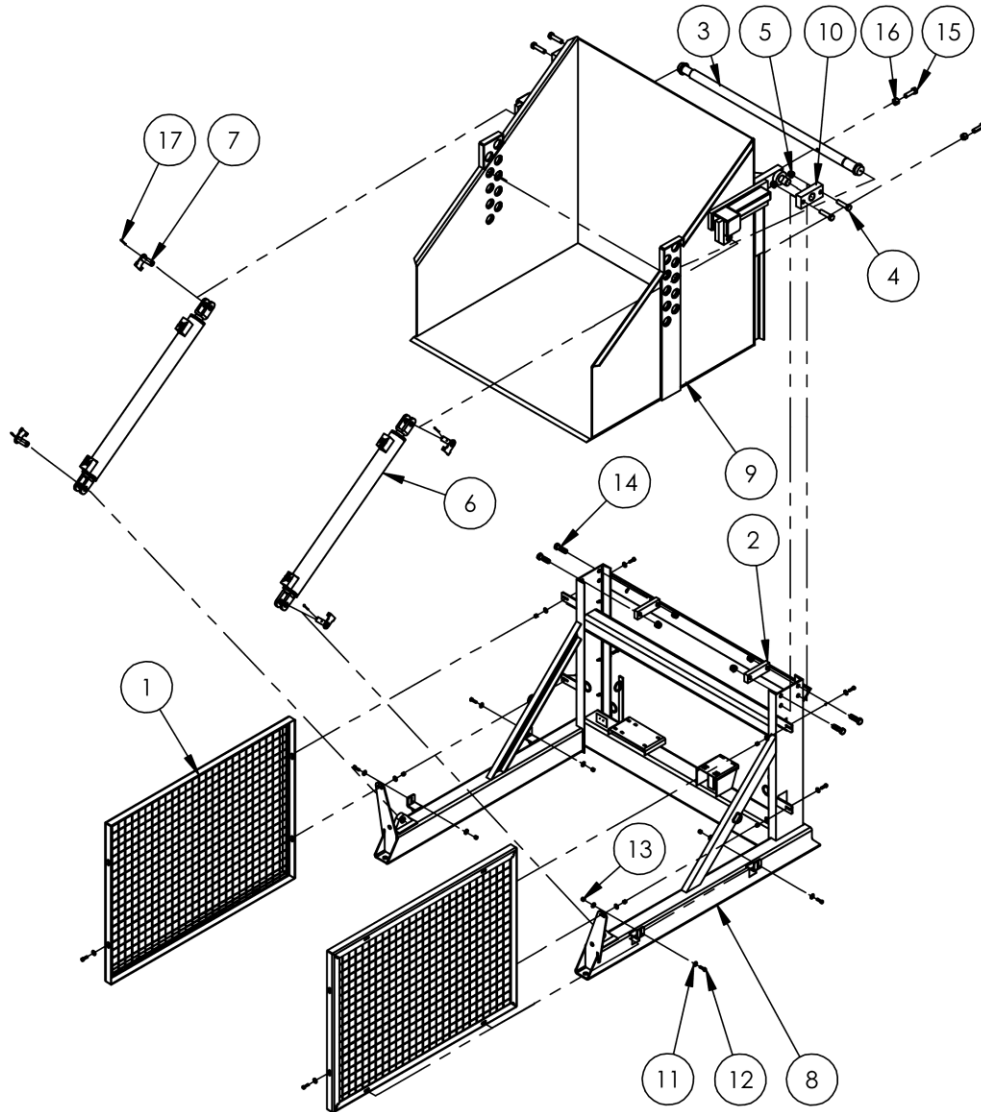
B: HBD-4-48 and HBD-4-60 EXPLODED VIEW & BILL OF MATERIALS
